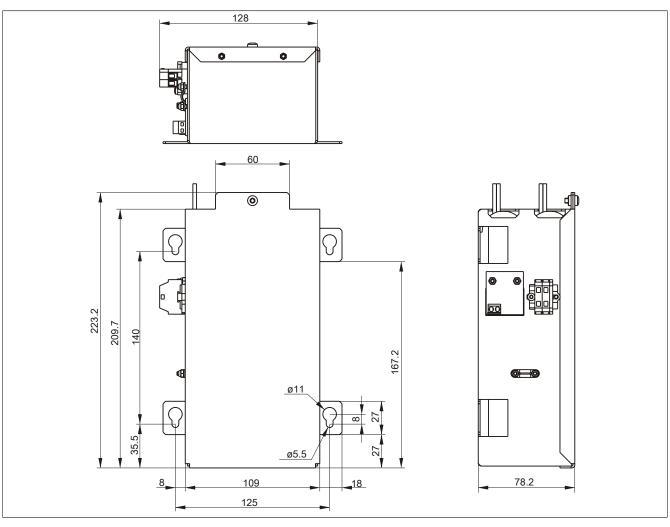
9A0100.16 ≥ Rev. C0 - Dimensions
